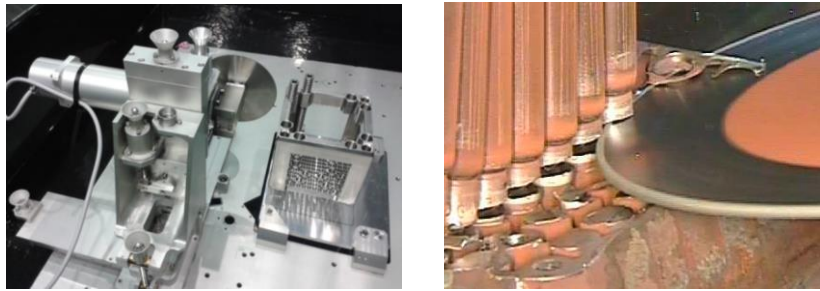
Test of a special cutting tool (left), bottom nozzle (BWR) – cut of tight fuel rod end plugs (right)
